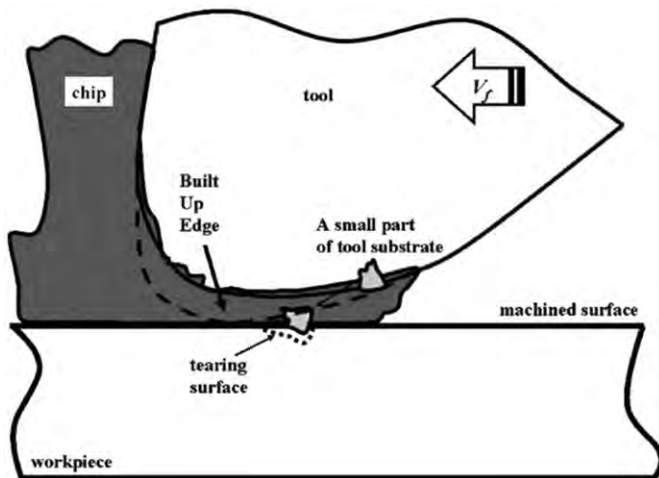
Surface tearing mechanism in machining of Ti-6242S [14].
